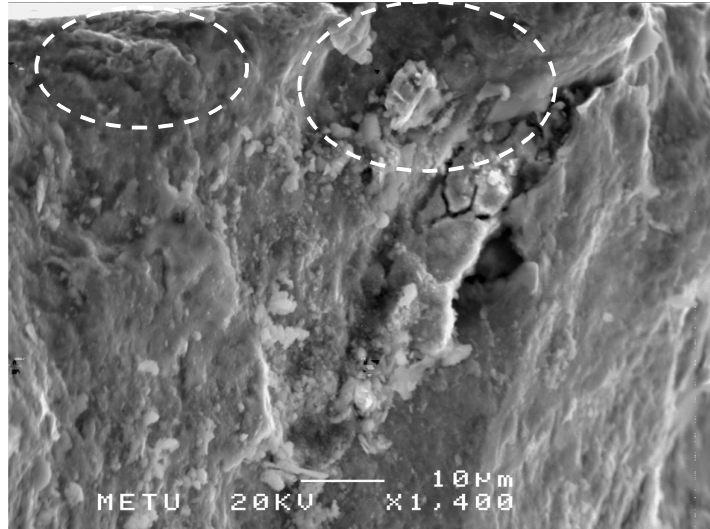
Fractograph showing the two crack initiation sites, X1400 (38MnVS6 crankshaft rolled at 12.5kN).
